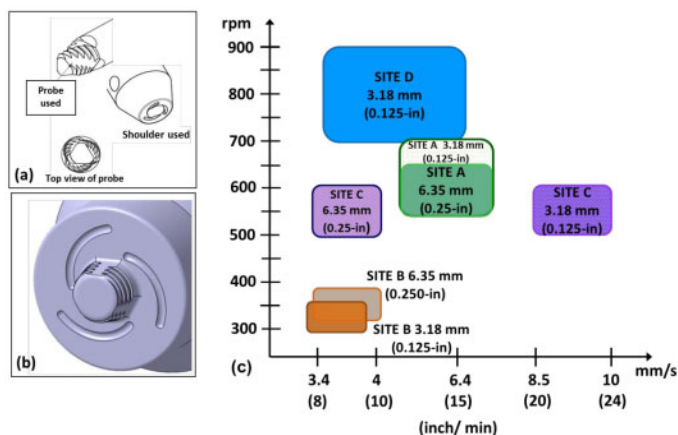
Tools used to make butt welds at WSU; (a) for welds of 6.35 mm (0.25-in) material; (b) for welds of 3.175 mm (0.125-in) material; and (c) Weld tool process windows for each site.
